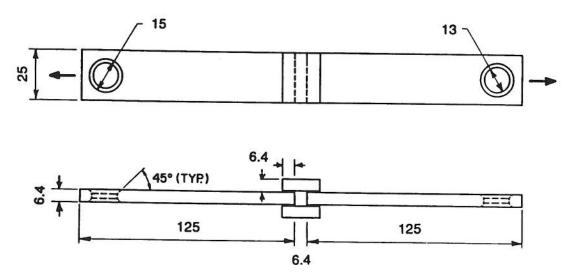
Bonded Specimen for Creep Shearing Tests; all Dimensions in mm
